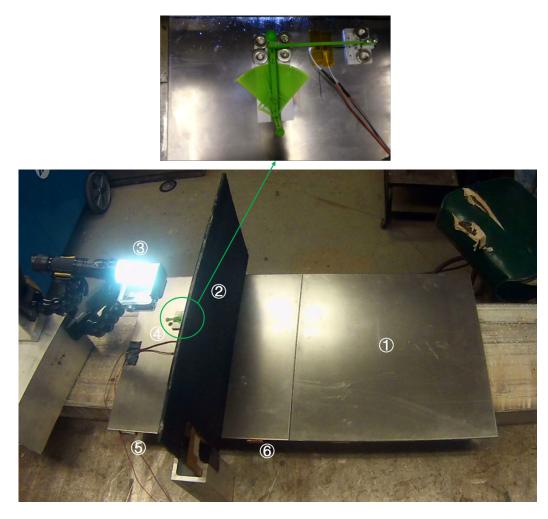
Welding preparation (① Steel Plate ② Protection Wall ③ Light and Camera ④ SAS ⑤ Aluminum Bar ⑥ Copper Bar)
